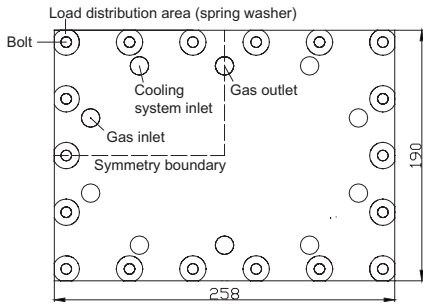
A top (x,y -plane) view of the flat end plate structure. The dimensions are in millimeters.
